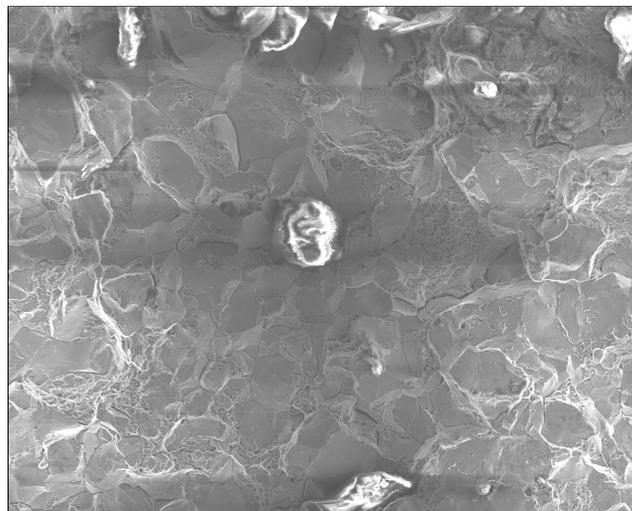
Image of fracture surface showing inclusion and brittle fracture
